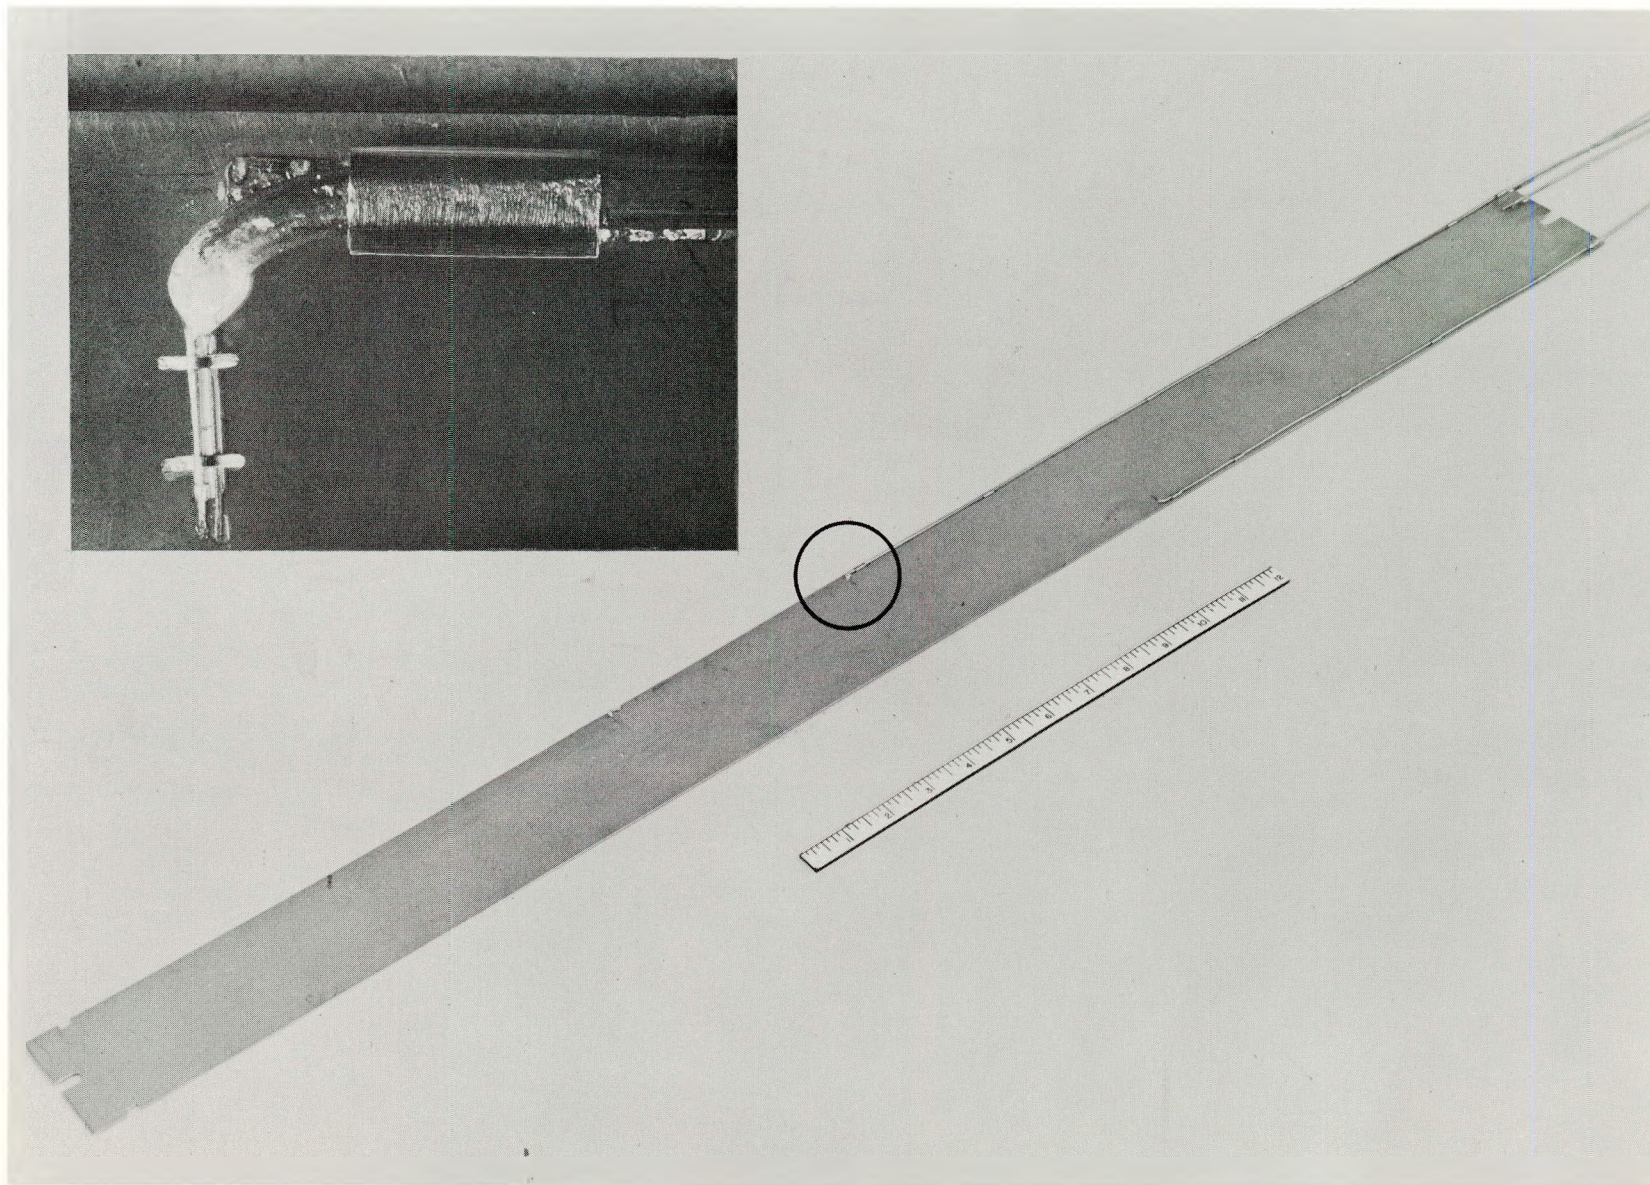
Fuel Plate With Attached Thermocouples With Close-Up of Attachment Method
